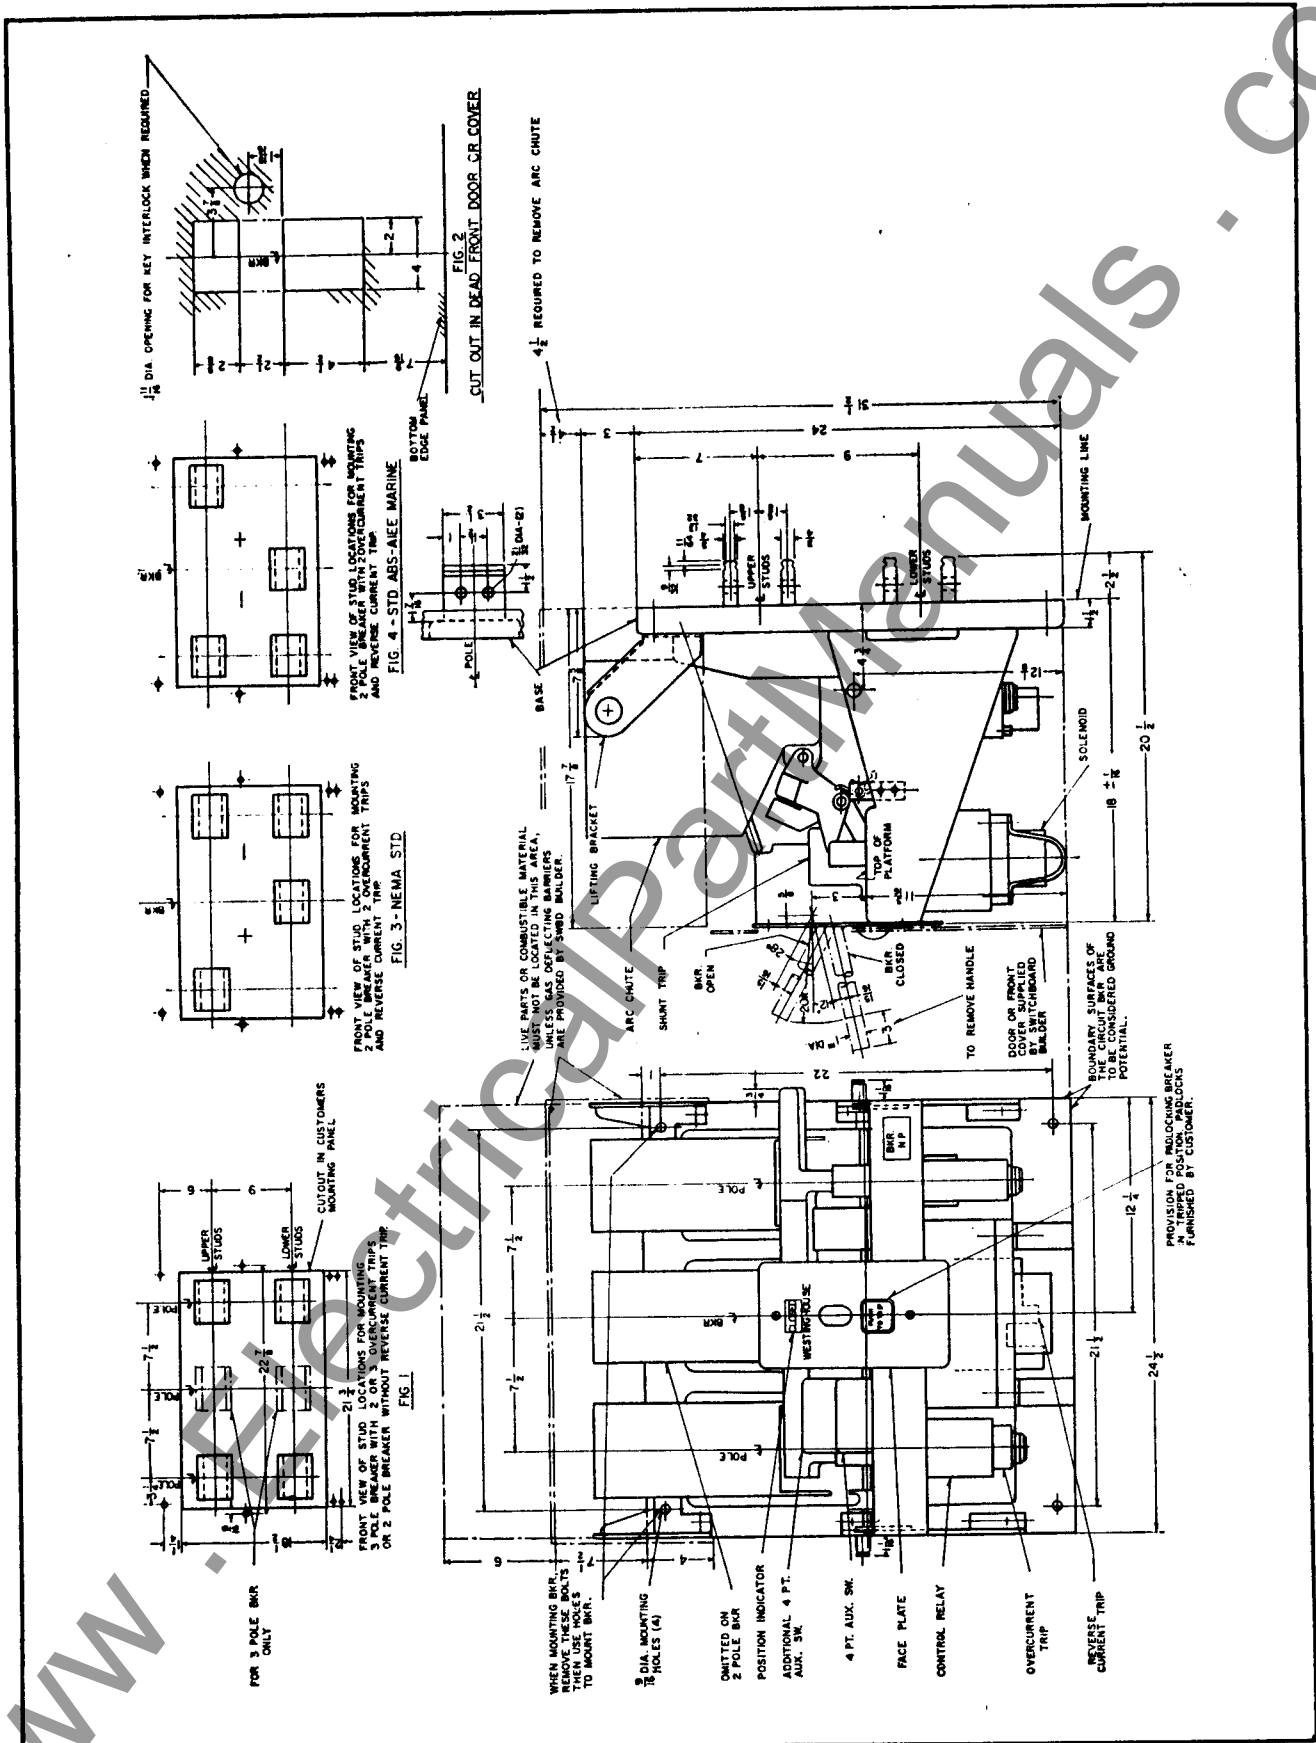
A. Type DB-75 Air Circuit Breaker. Fixed Outline and Mounting Dimensions
